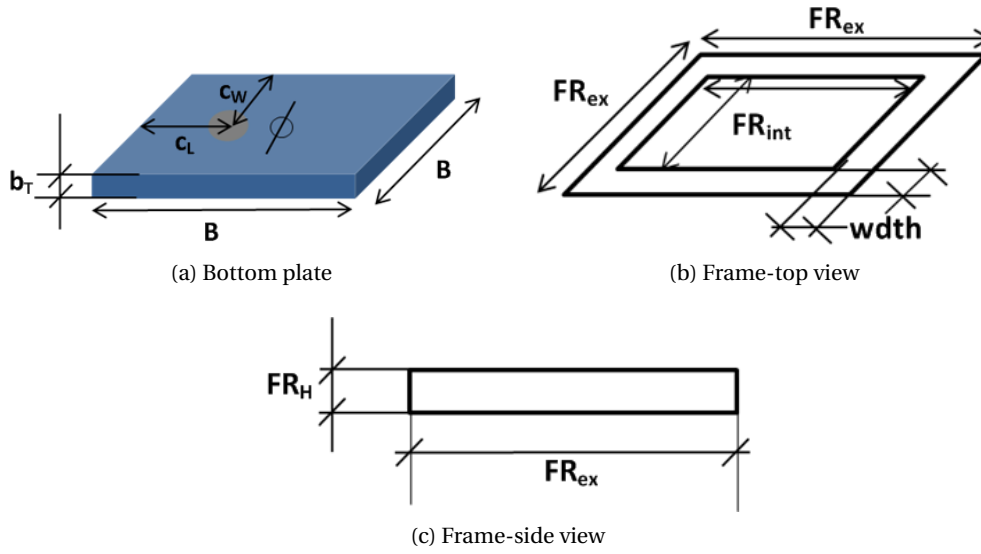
2D sketches of the designed mold: (a) Bottom plate, (b) Frame - top view and (c) Frame - side view.
